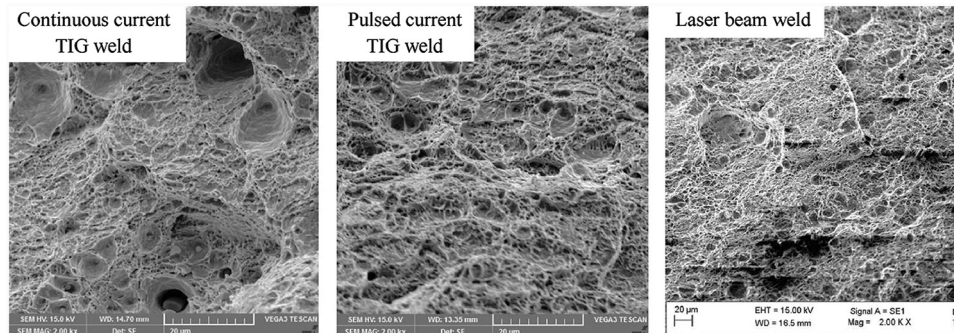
Fractographs of fractured surfaces of tensile test samples of dissimilar steel welds made by different welding processes.
